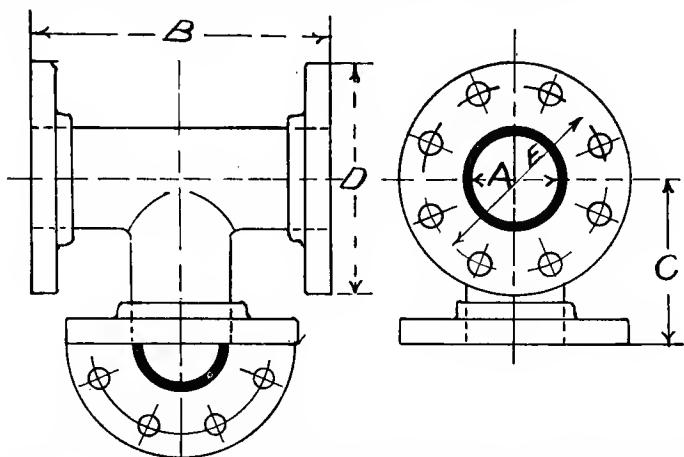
MILD STEEL STEAM TEES WITH STANDARD FLANGES OF BRITISH ELECTRIC TRACTION CO.
